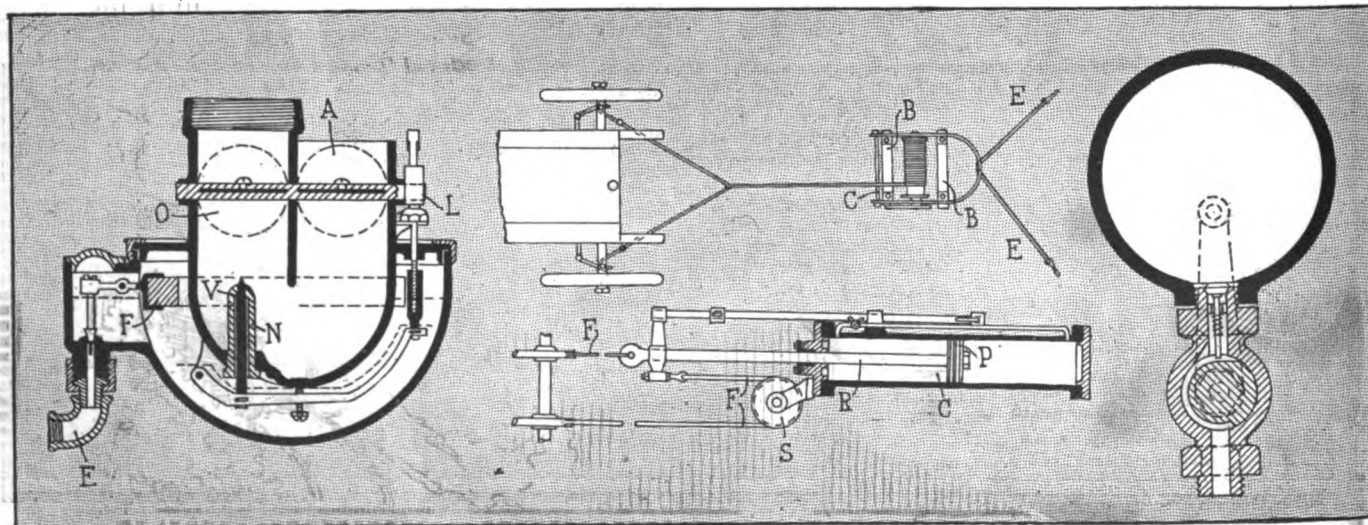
Gentle carbureter. Fig. 2—McCall extricator. Fig. 3—Kelley compressed air starter. Fig. 4—Miller reservoir self-starter
